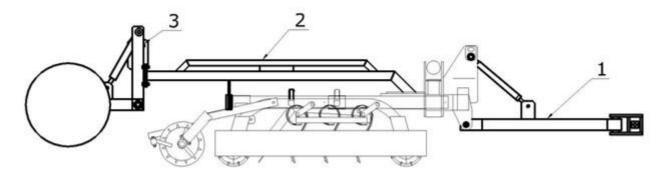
View of the SHARP seedbed cultivator trolley: 1 - trolley drawbar, 2 - trolley frame, 3 - trolley lifting system
